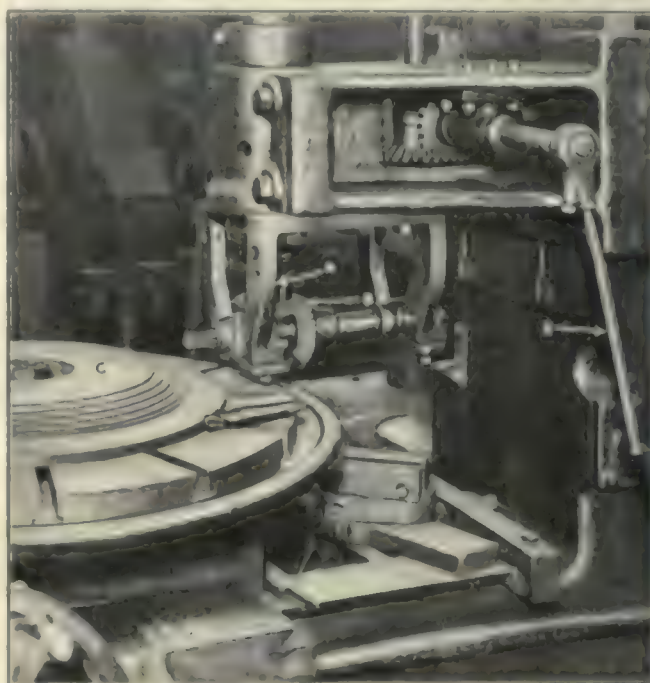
MILLING PORTS IN VALVE BUSHINGS
